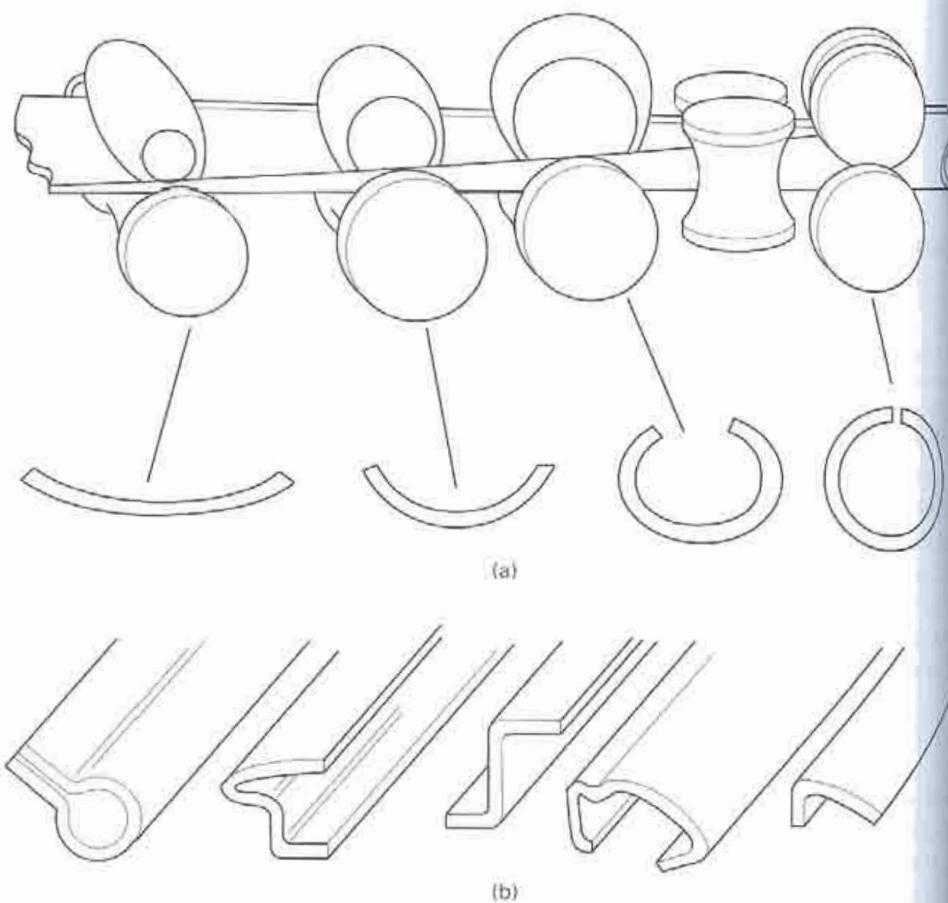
(a) Schematic representation of the cold roll-forming process being used to convert sheet or plate into tube. (b) Some typical shapes produced by roll forming.
